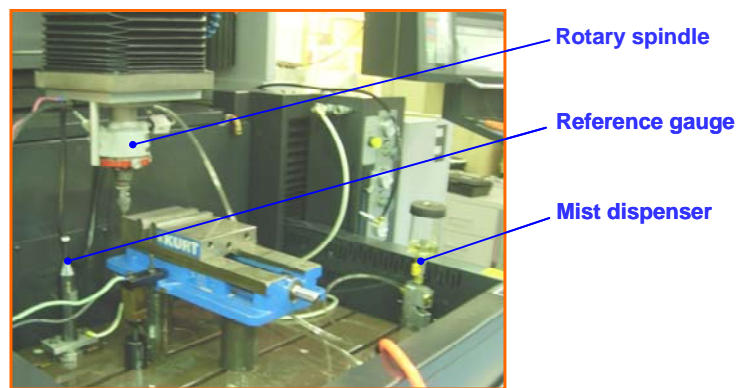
Dry and near-dry EDM milling setup on the Sodick EDM machine.
